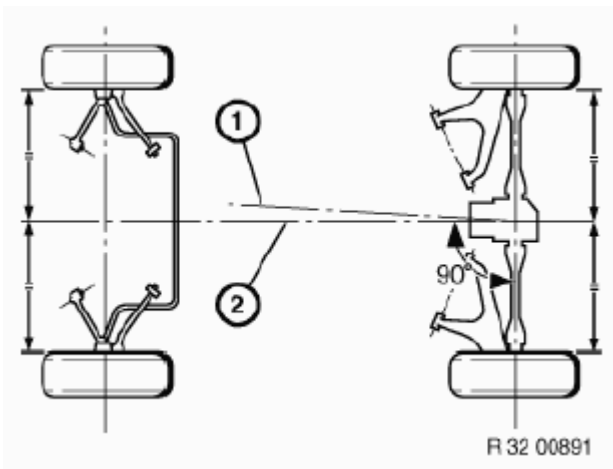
Geometrical Drive Axis/Symmetrical Axis
